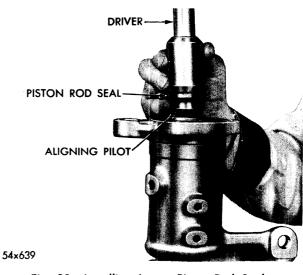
Installing Lower Piston Rod Seal (Tool C-3395)
